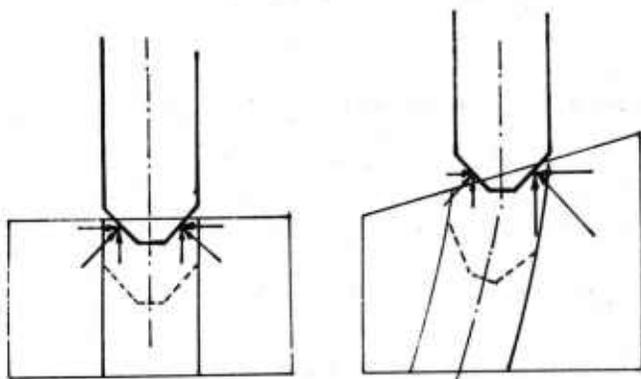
Hole Geometries Produced by Different Slopes of the Workpiece Surface
